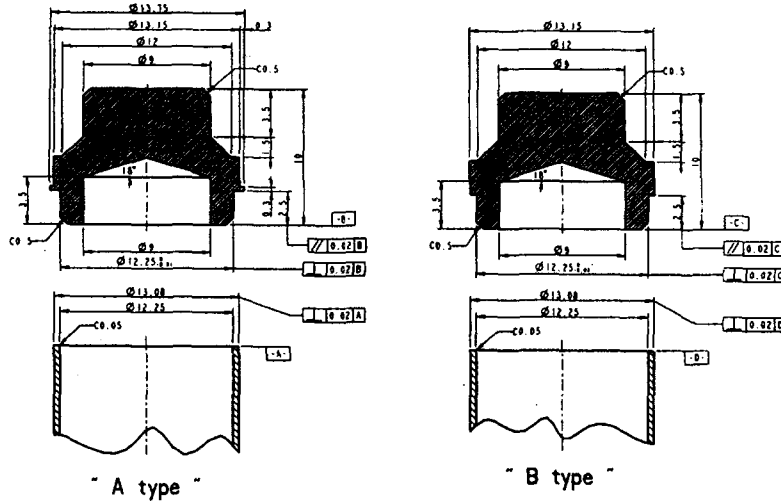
Configuration of Zircaloy-4 Weld Specimens
